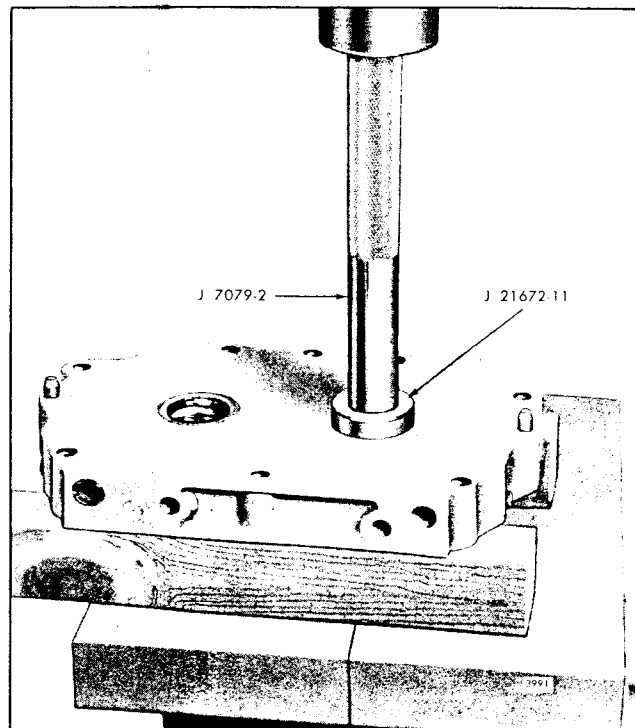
Removing Oil Seal and Roller Bearing from Rear End Plate (Former Blower)
